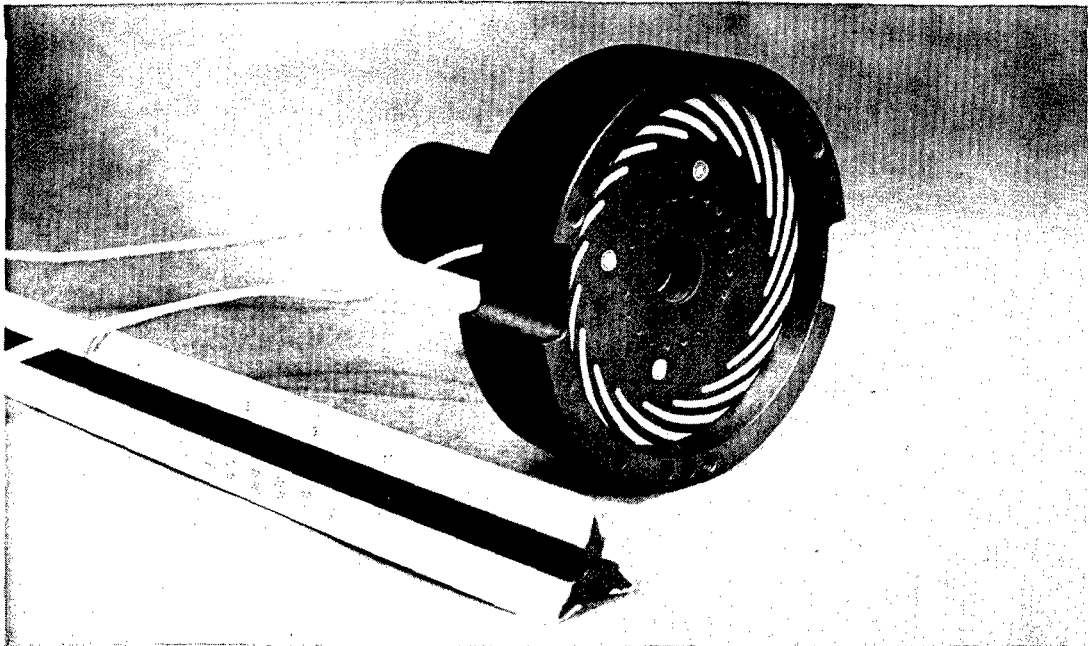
View of the Thrust Bearing Stator Assembly Showing Combined Self-Acting and Externally-Pressurized Bearing Sections
